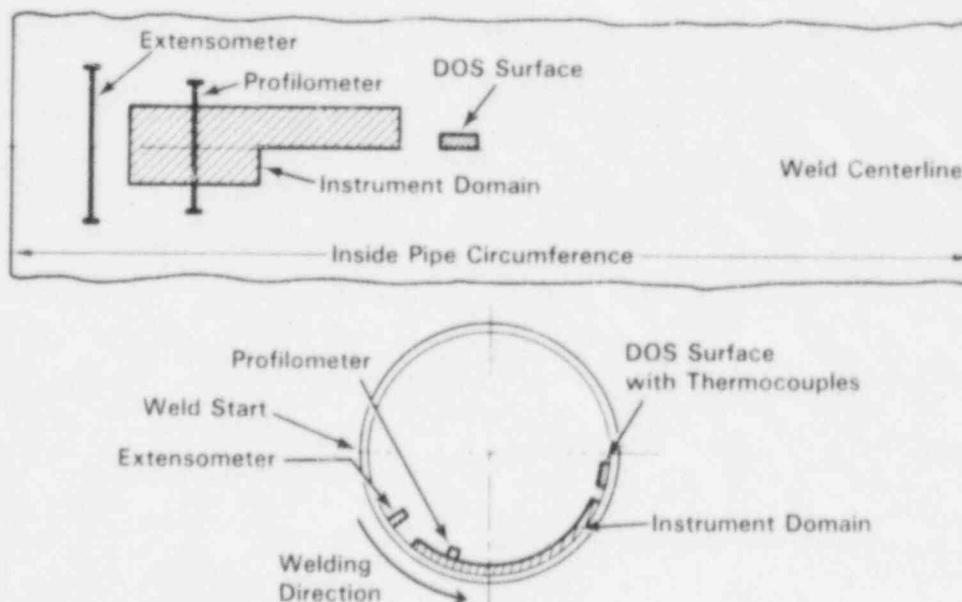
Layout of the Thermomechanical Sensors Around the Inside Surface of the 24-in.-dia 304 SS Pipe
